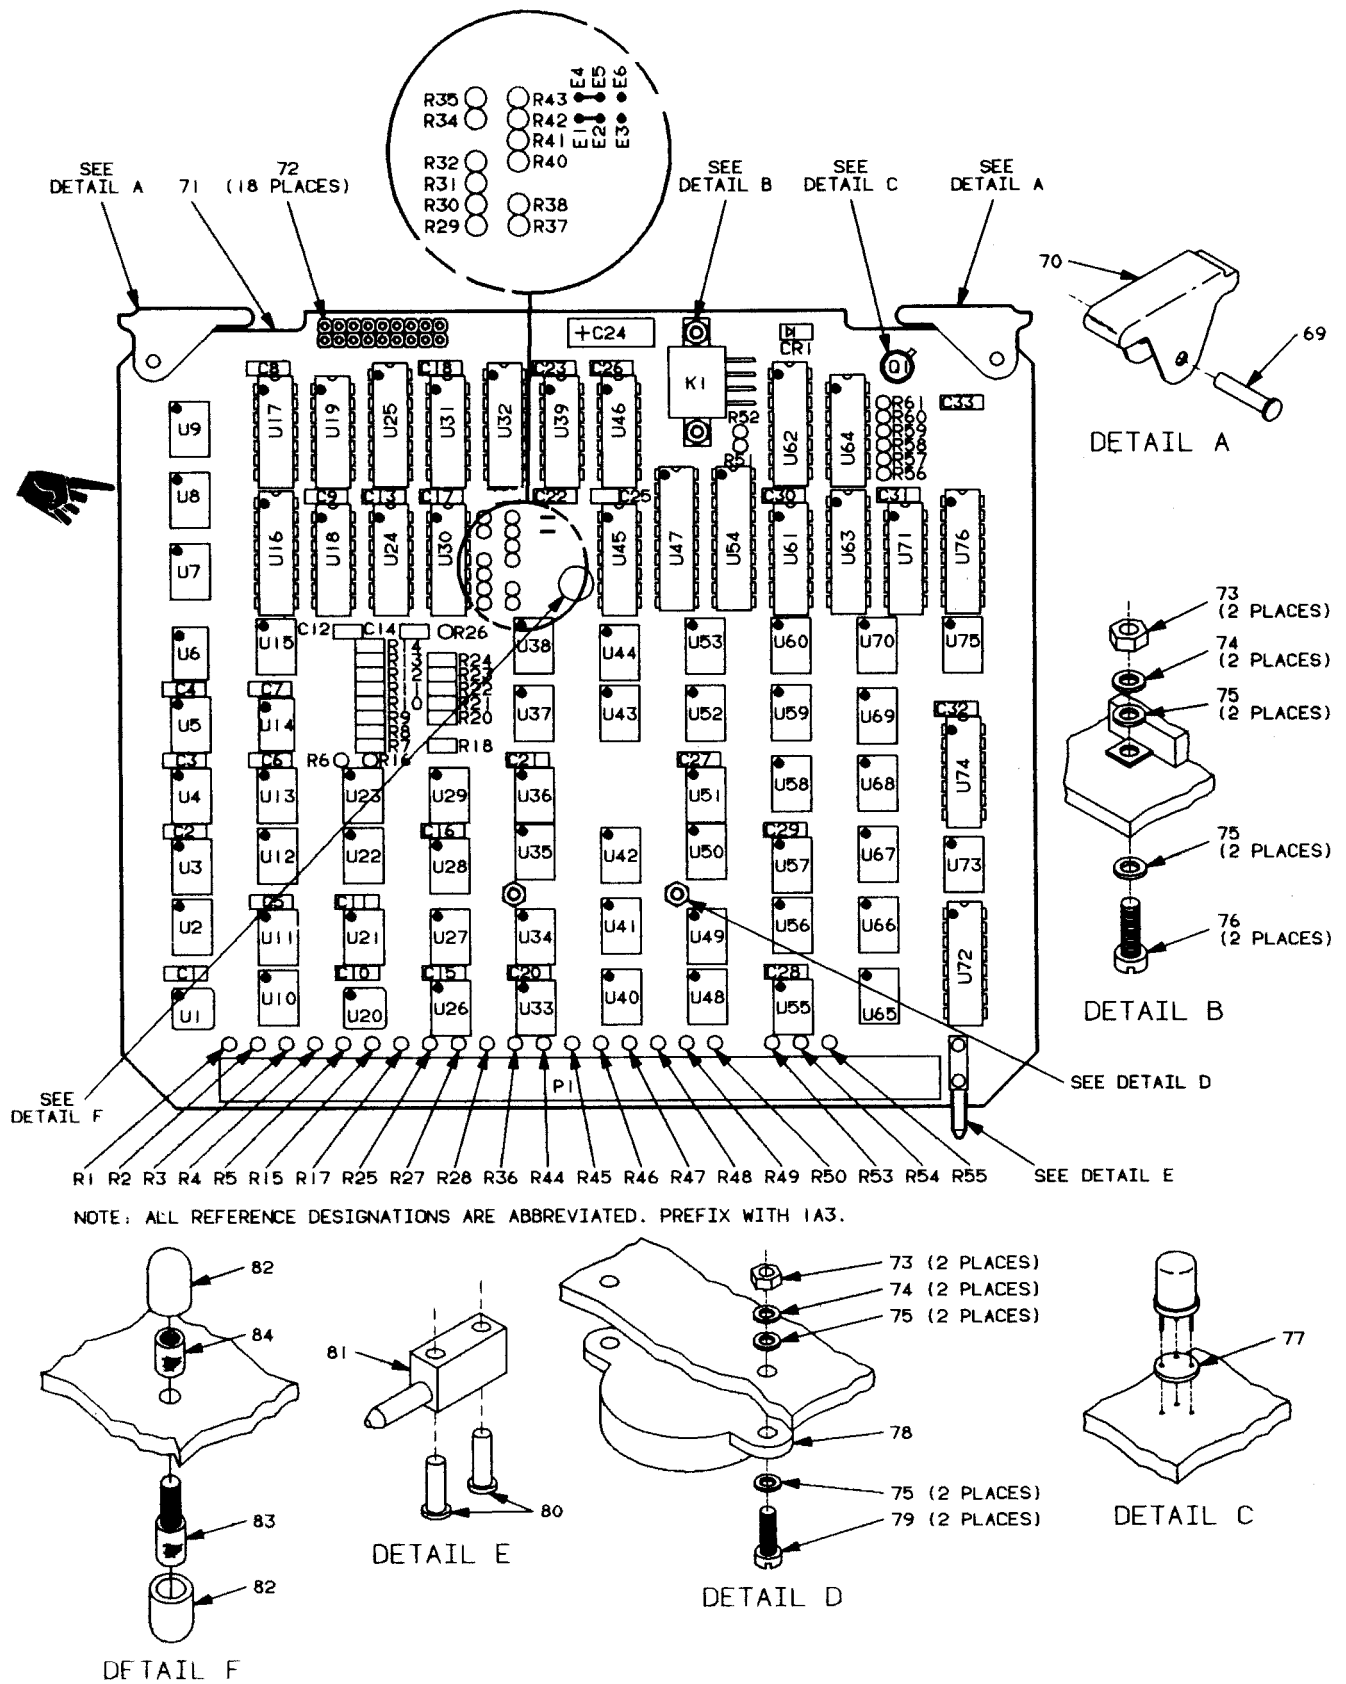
Circuit card assembly: modem (1A3) (9355760) (Sheet 1 of 2)
